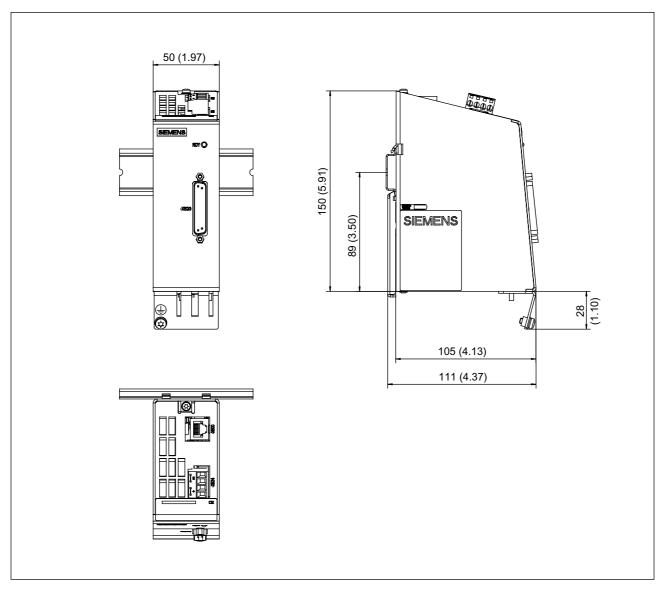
Dimension drawing of the Sensor Module Cabinet SMC10, all dimensions in mm and (inches)
